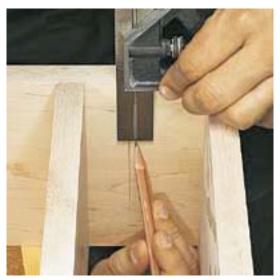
On the inside of the case, lay out the center of the Roto-Hinge countersink using the dimensions shown in the Builder's Plans.
